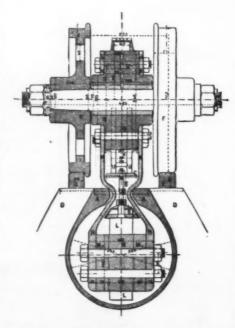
SECTION OF THE TUBE AND BUFFER CAR.
